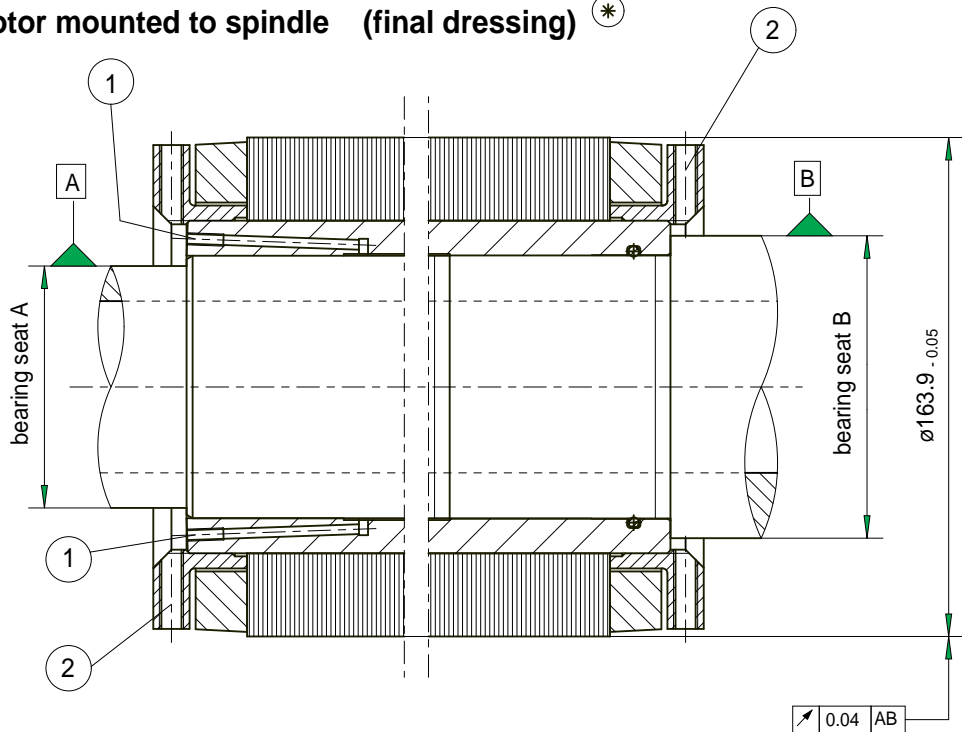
1MB 240 frameless spindle motor - dimensional data (part 2)
